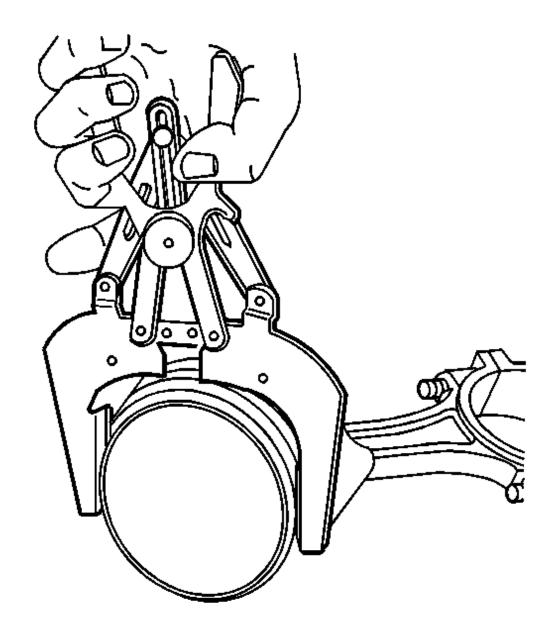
Cleaning Piston Ring Grooves With Suitable Ring Groove Cleaning Tool Courtesy of GENERAL MOTORS CORP.
